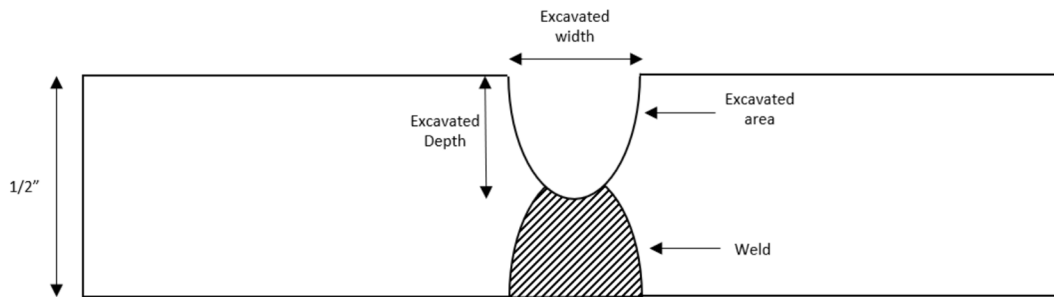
MPC shell-to-shell joint after excavation of the weld defect
